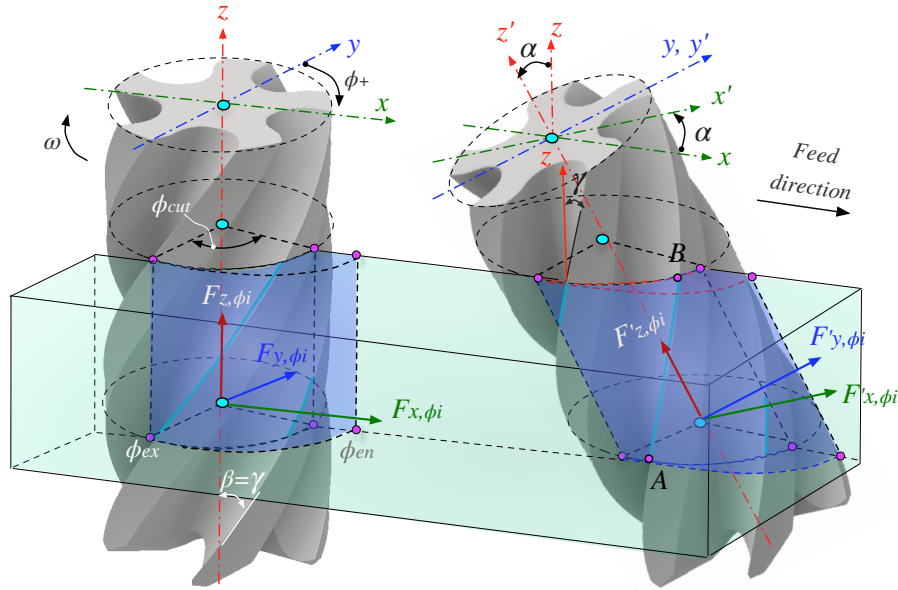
Schematic representation of the cutting forces acting along the workpiece and tool reference frame axes: ϕ - tool angular position; ω - tool rotation direction; ϕ_{en} - edge enter angle; ϕ_{ex} - edge exit angle; γ - angle between the axis z in the workpiece frame and edge; β - helix angle; α - tilting angle; $[F_{x,\phi_i}, F_{y,\phi_i}, F_{z,\phi_i}]$ and $[F'_{x,\phi_i}, F'_{y,\phi_i}, F'_{z,\phi_i}]$ are cutting forces that act in the workpiece and tool reference frames respectively
